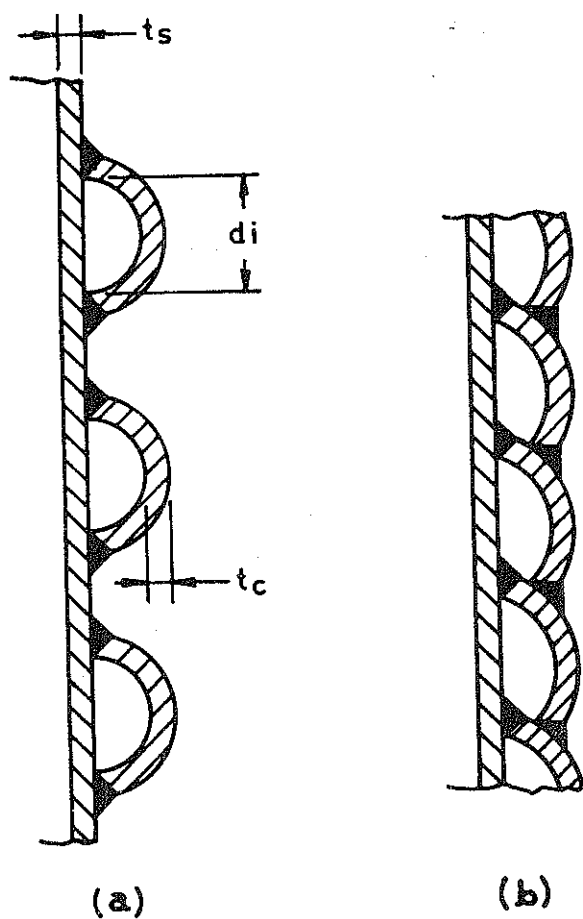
(a) Half coil jacket welded to shell
